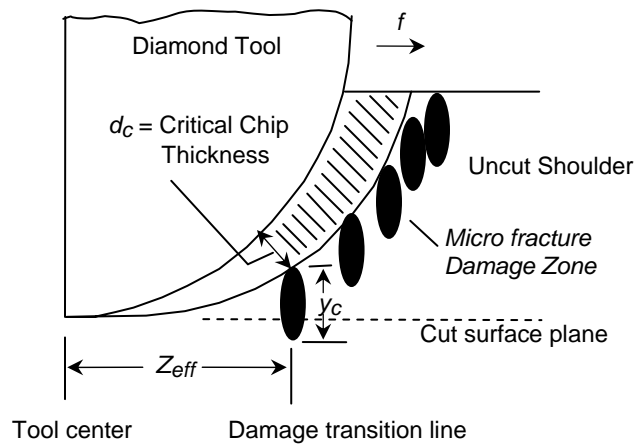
A projection of machining cut perpendicular to the cutting direction.
